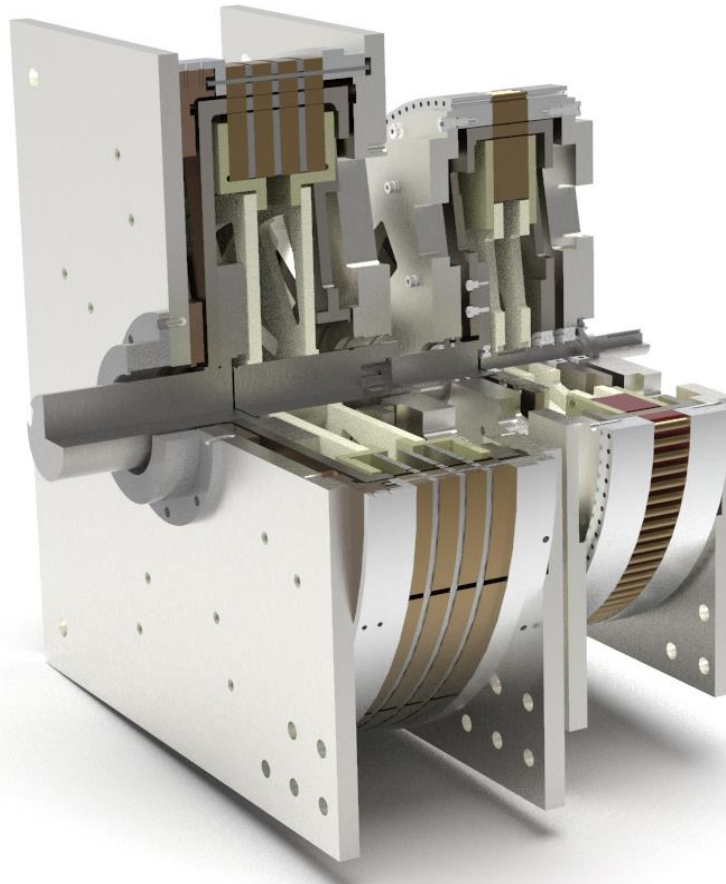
90-degree cutaway view of the final assembly of the MSMG design.
